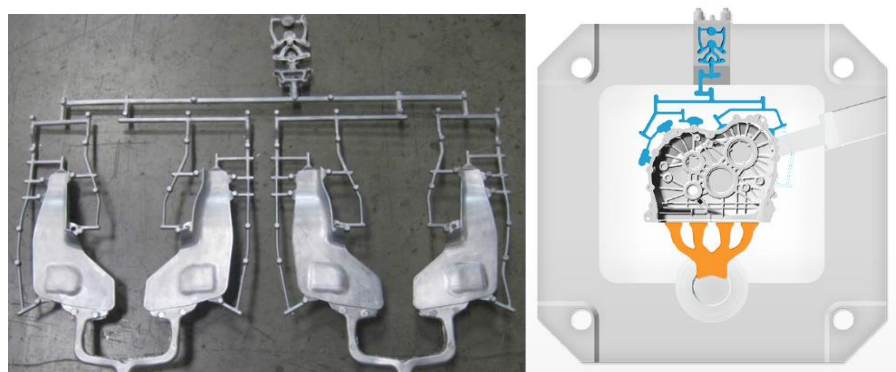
Examples of a vacuum runner system layout with a mechanical vacuum valve [106].
